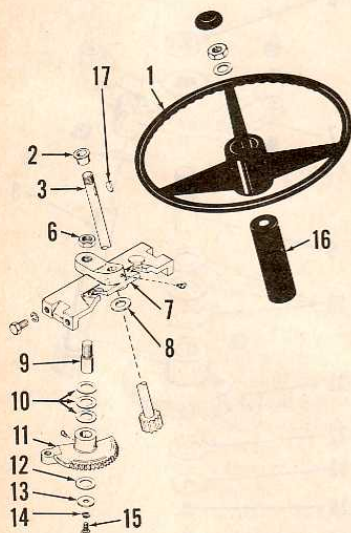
Exploded view of steering gear assembly used on late model 444 and all model 224 and 446 tractors.
